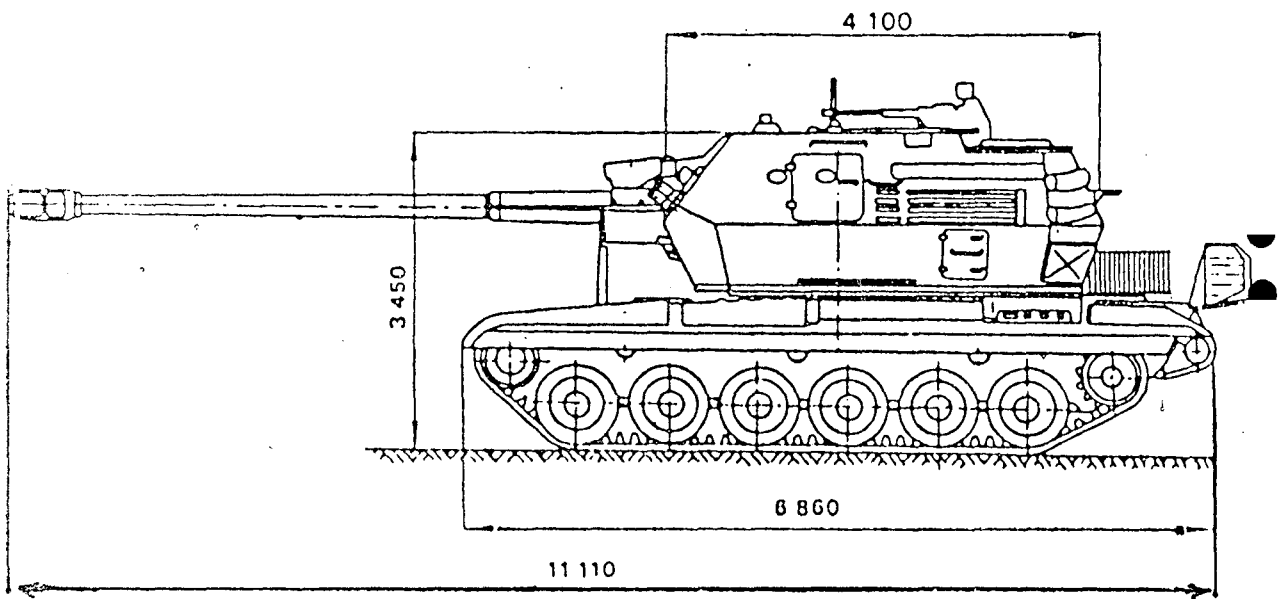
Side drawing of T-72M1 chassis fitted with Zuzana 155 mm/45 calibre artillery turret
